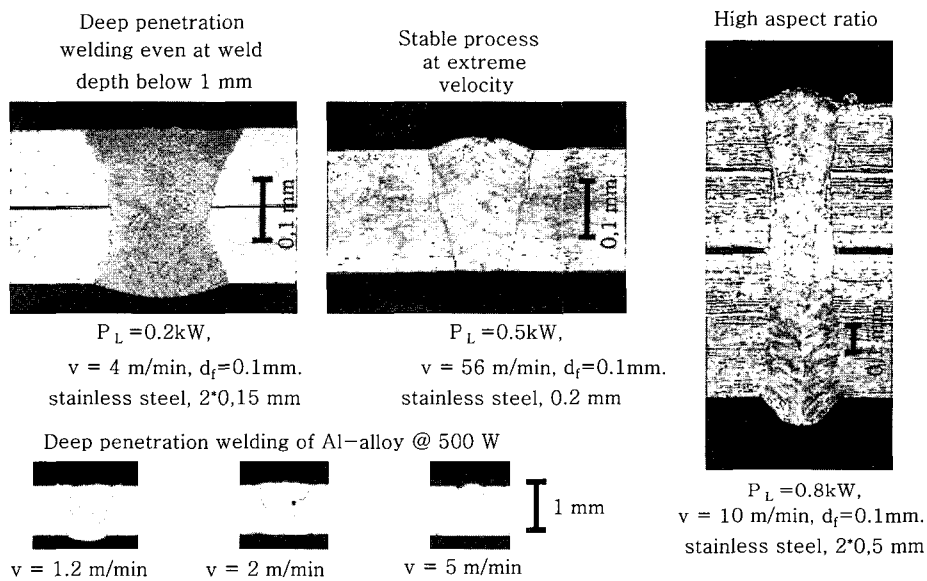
Weld bead shape by disk laser (Courtesy of Dr. A. Giesen)
